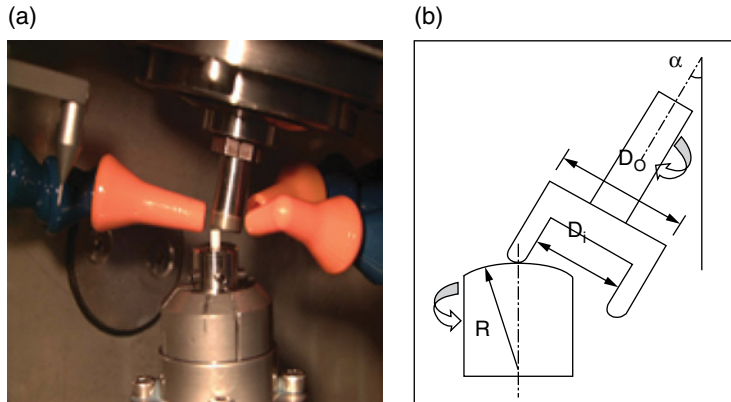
(a) Grinding set-up on the Loh Grinder. (b) Schematic illustration of convex spherical surface generation using a cup wheel Reproduced with permission from [25]. Copyright 2004 Elsevier
